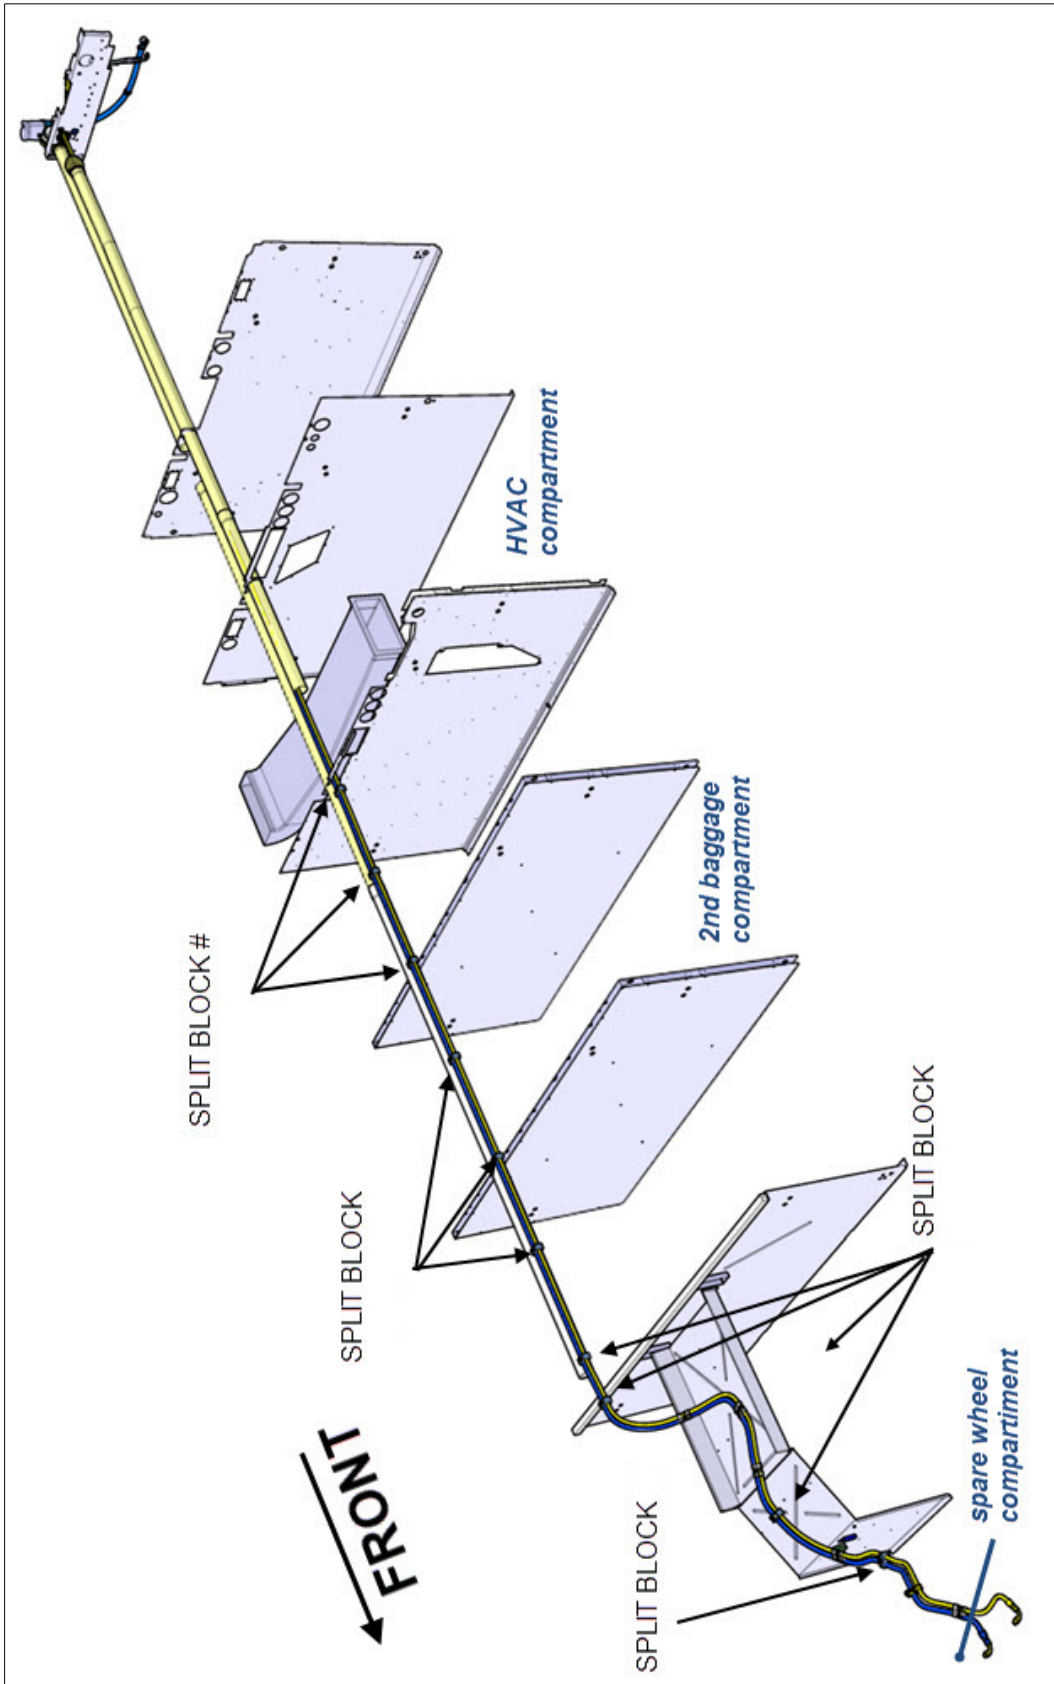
POWER STEERING PUMP DISCHARGE HOSE (PRESSURE) H3-45 SHOWN
